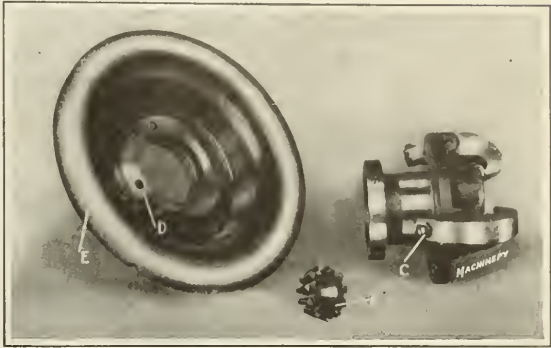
Bevel Pinion Chuck shown in Fig. 2, dismantled to show Construction
